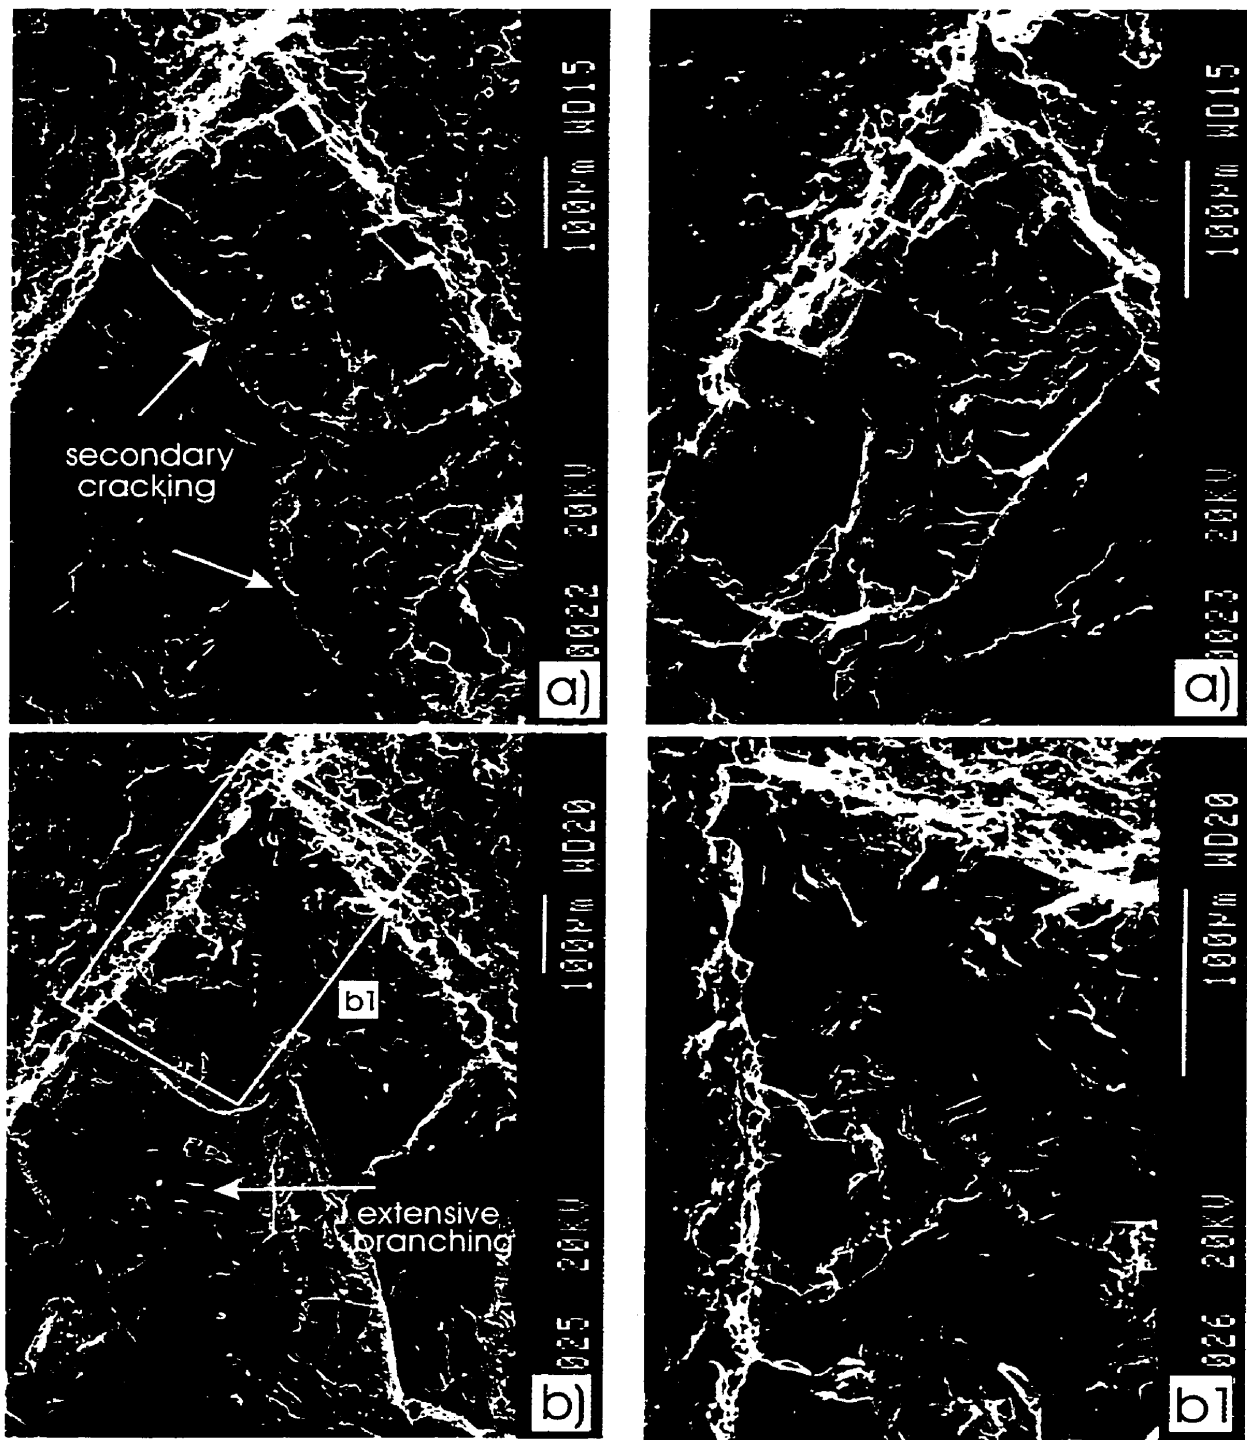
SEM fractographs of the specimens (a) and (b) from Fig.5.24 tested at 400°C (14Mn-0.65B alloy). Fractographs (a) represent two halves of the same specimen. b1 shows a high magnification frame of the crack tip.
